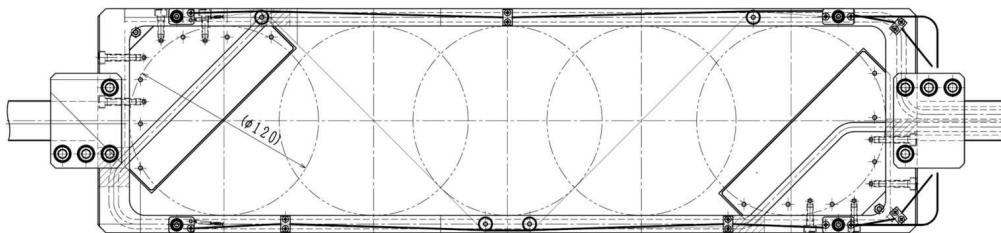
(b): Example WSM head and wire frames in the L3BT section.
